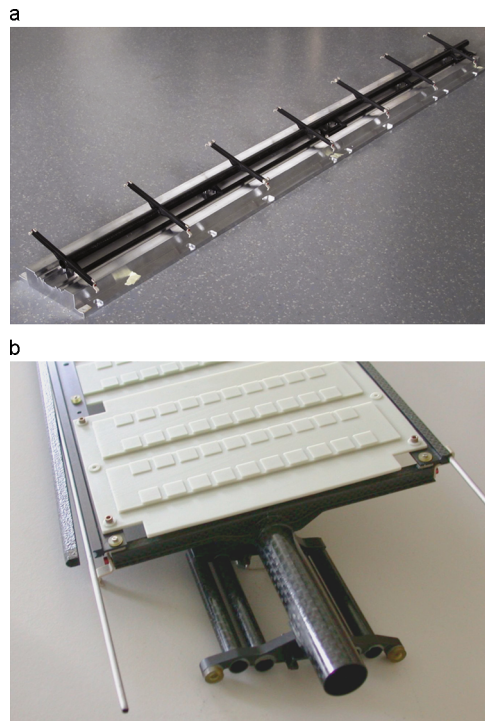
Photograph of the assembled prototype LS on its jig, before being equipped with the cooling plates, service bus and DSM modules (upper). Photograph after assembly of the cooling plates, cooling tubes and dummy DSM250 modules (lower).
